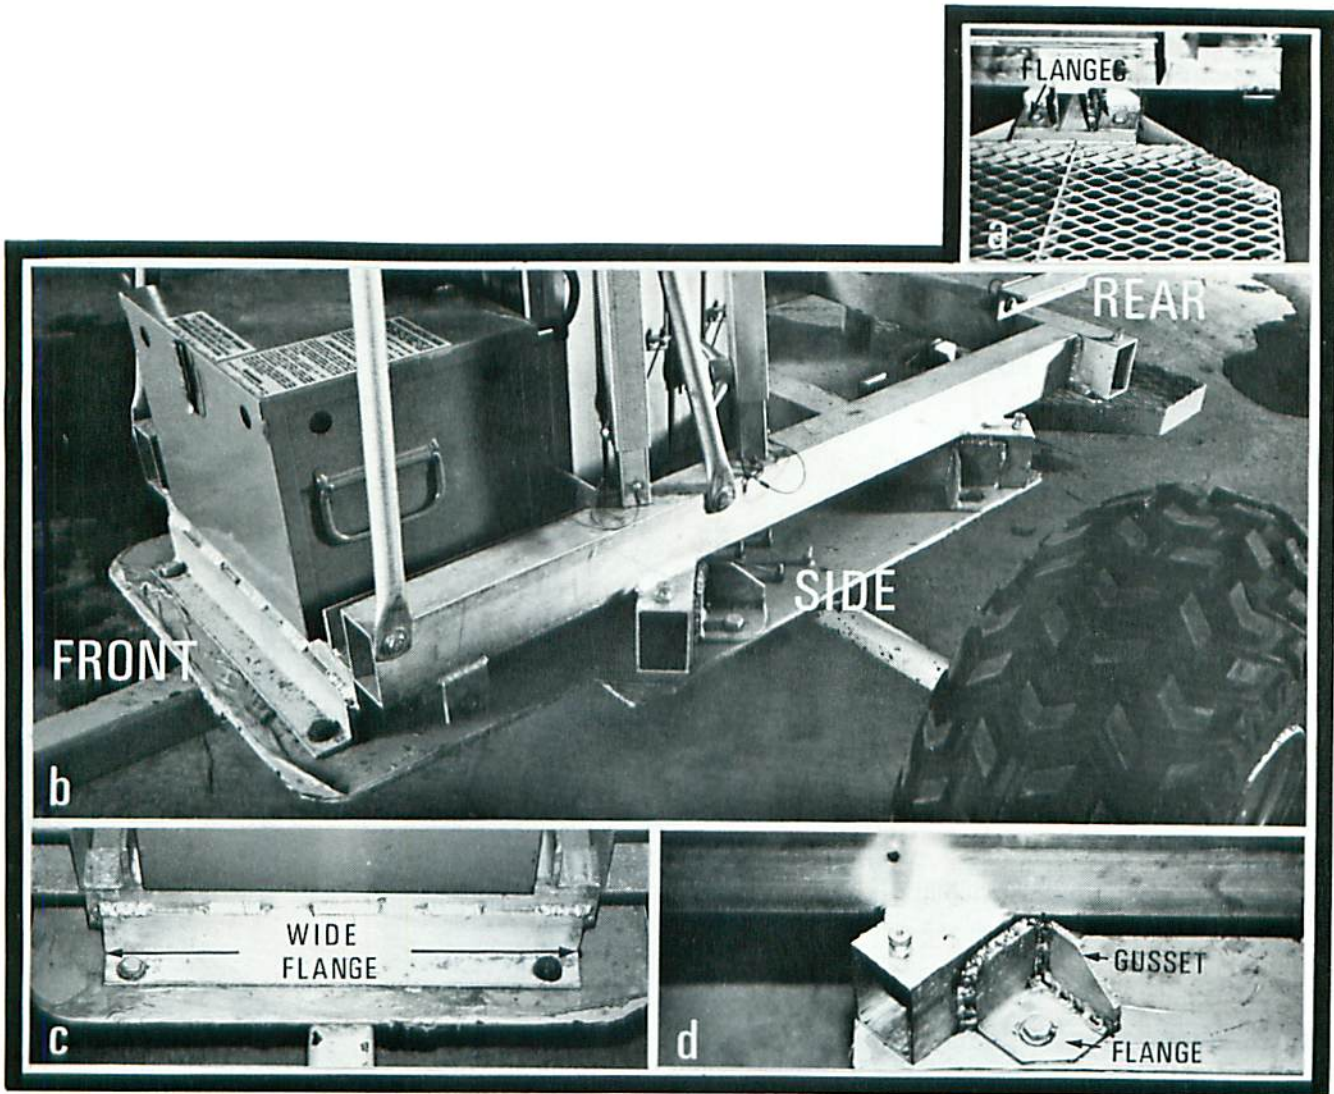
Two three-inch wide flanges shown at rear (a), overall view (b), one 18-inch wide front flange (c), and a side flange with close-up of gusset (d).
